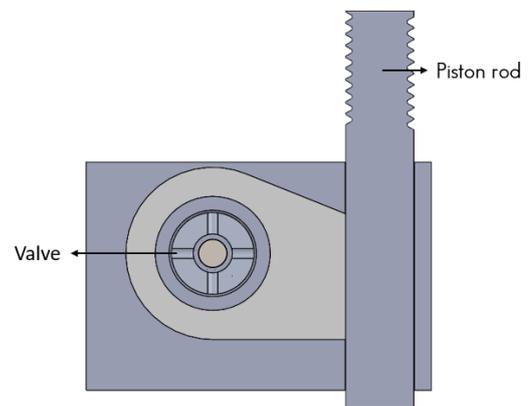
Section view of the parallel vertical orientation concept in the cylinder head
